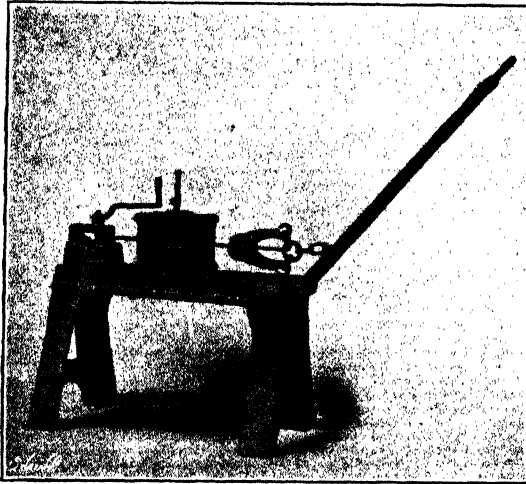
POINTING FURNACE—G. CROSSLEY.
